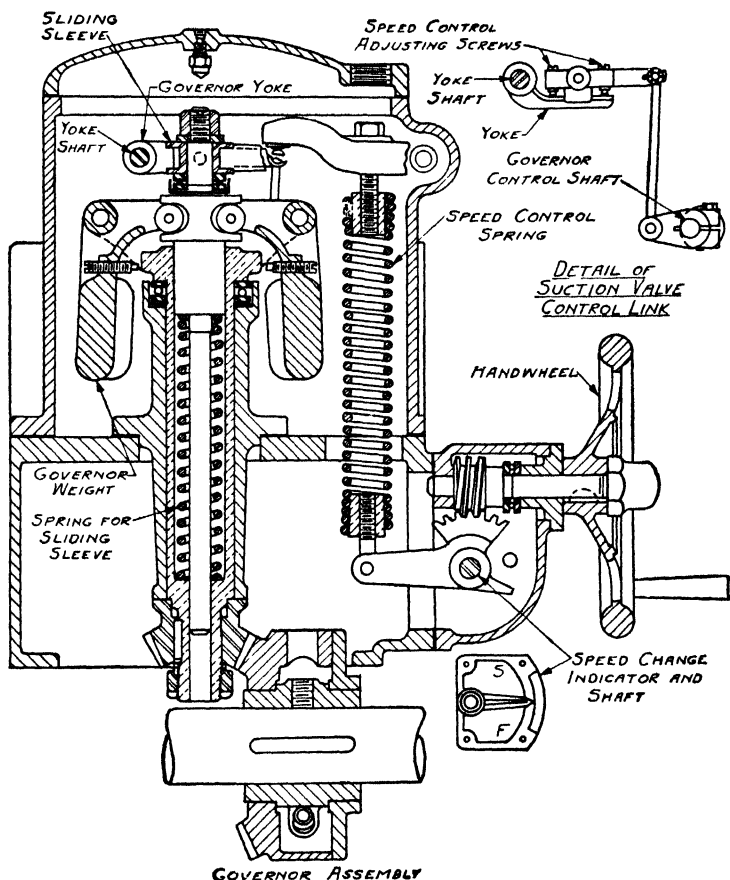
Section Through Governor Unit, Showing Speed Control Mechanism, Fairbanks-Morse Marine Engine
